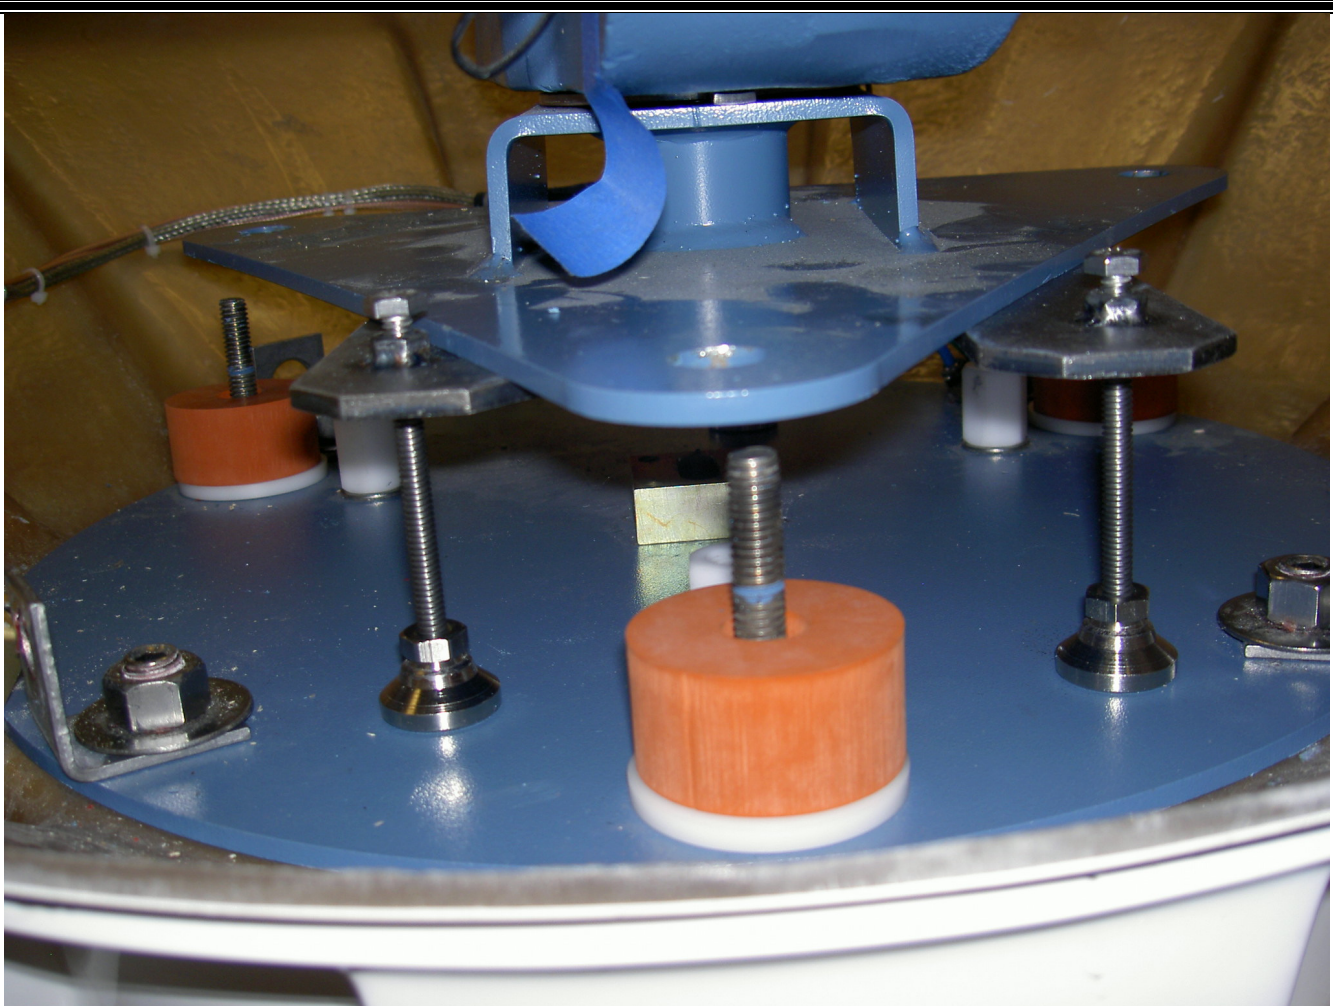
Spindle Base Weldment in the Raised Position
